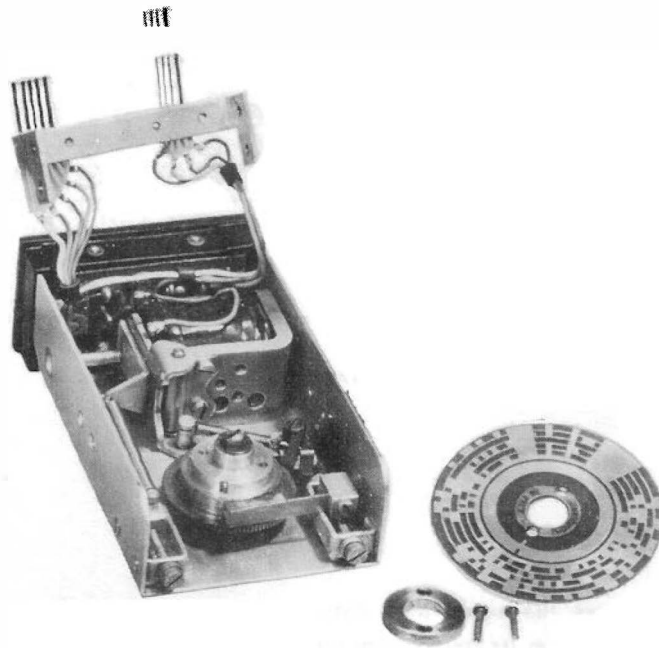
shows the coder with the contact assembly and coding disc removed. The coder should first be removed from its cover, care being exercised to avoid damage to the contact assembly.
